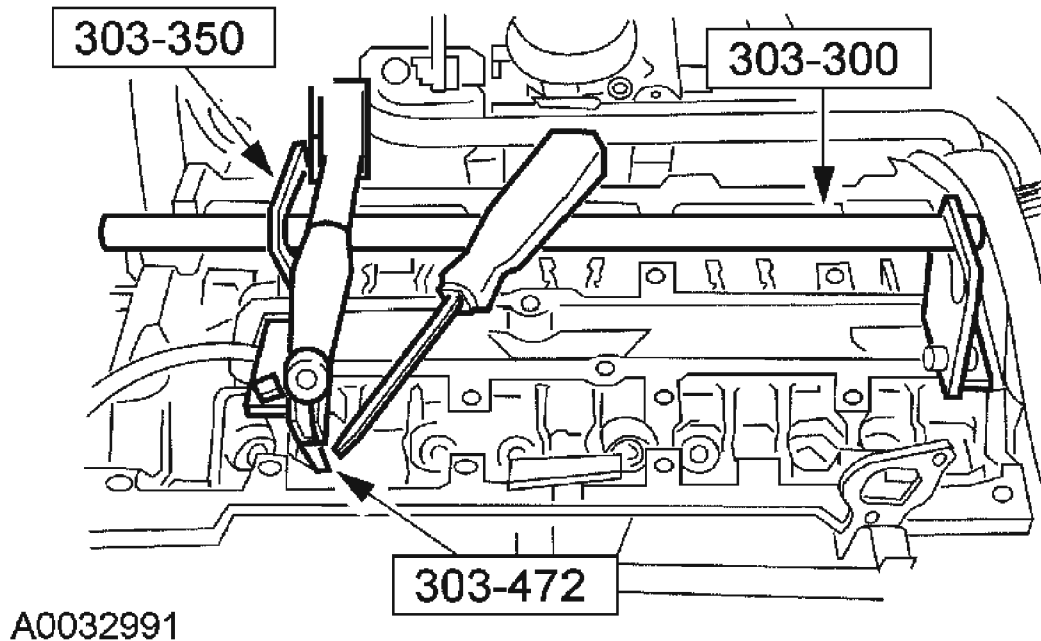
Using Special Tools To Apply Compressed Air To Cylinder
